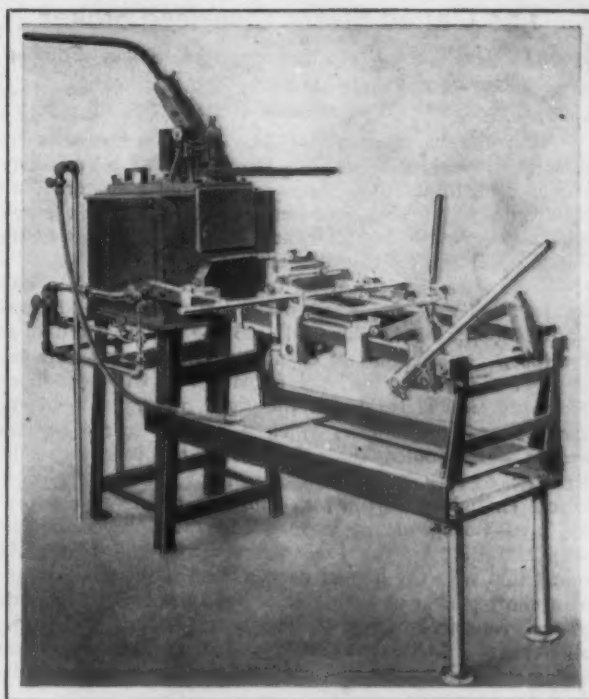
A Machine for Making Die Castings Built by the Loss Mfg. Company, Brooklyn, N. Y.
